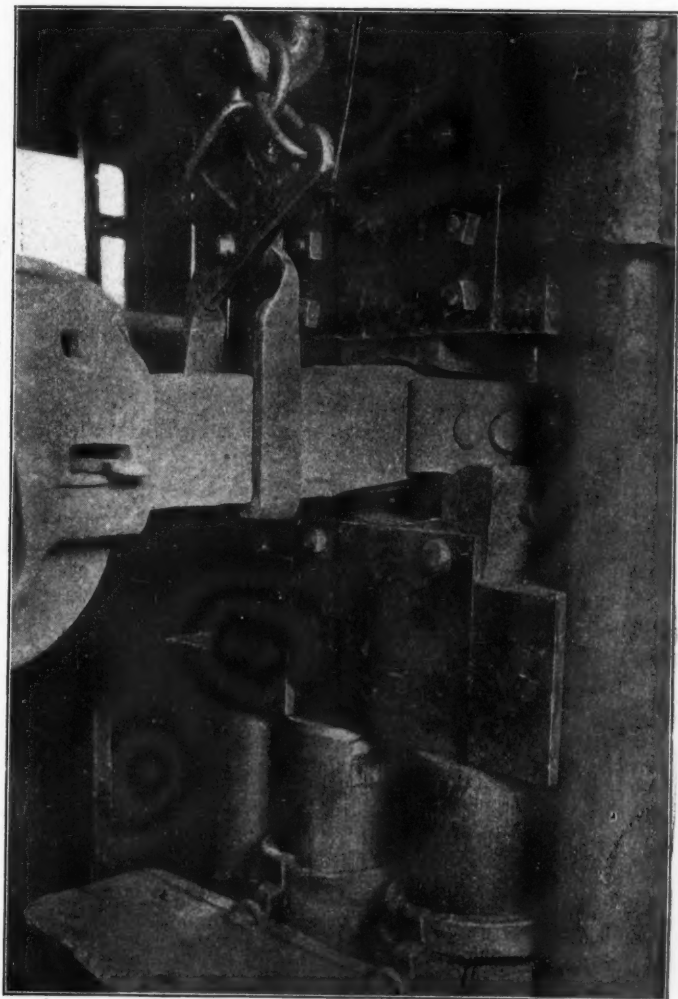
Coupler Yoke Rivets About to be Sheared.
